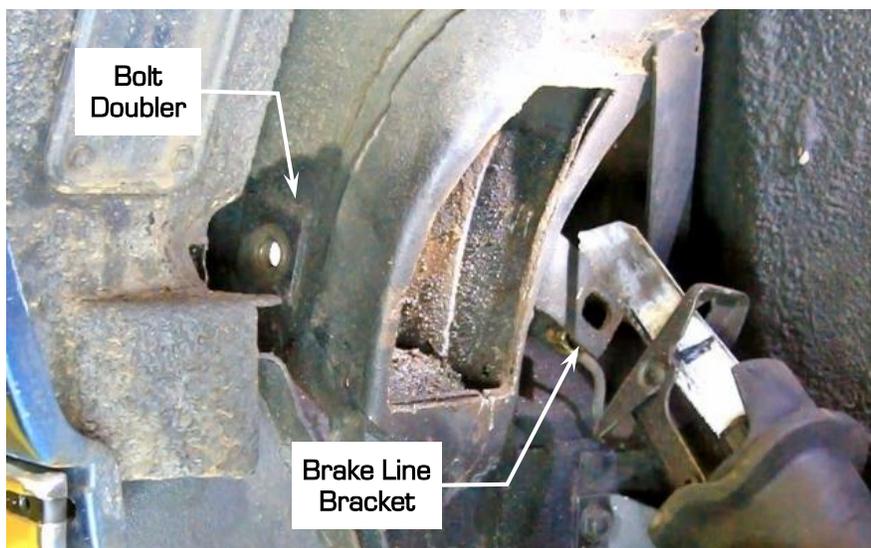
Remove Park Brake Cable Bracket and Trailing Arm Bolt Doubler
